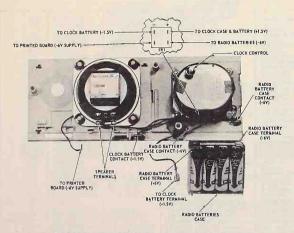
Rear view of cabinet front with printed circuit chassis removed.
